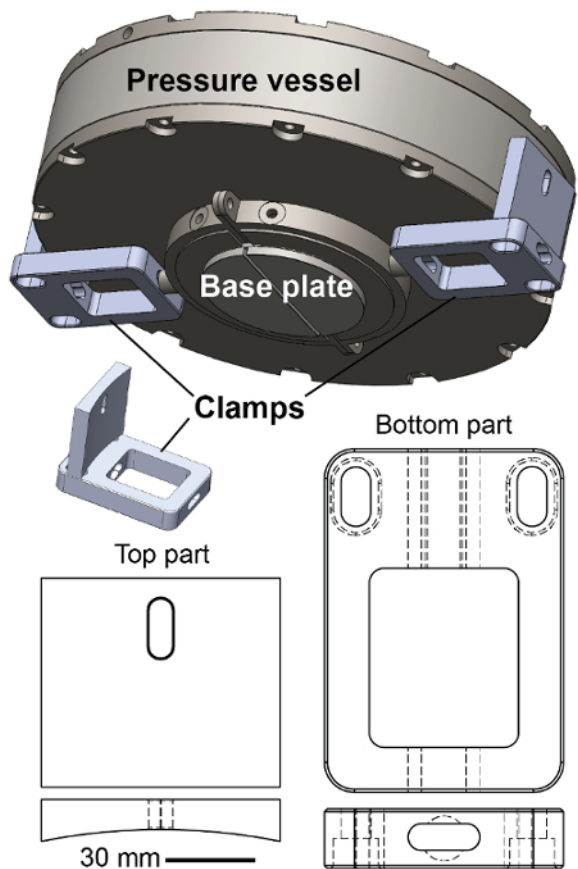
Clamps to fix the basal piston to the pressure vessel. 3D view of the pressure vessel, basal piston and clamps (top), and scaled drawings of the top and bottom parts of one clamp, including a 3D view (bottom). [Please click here to view a larger version of this figure.](#)
